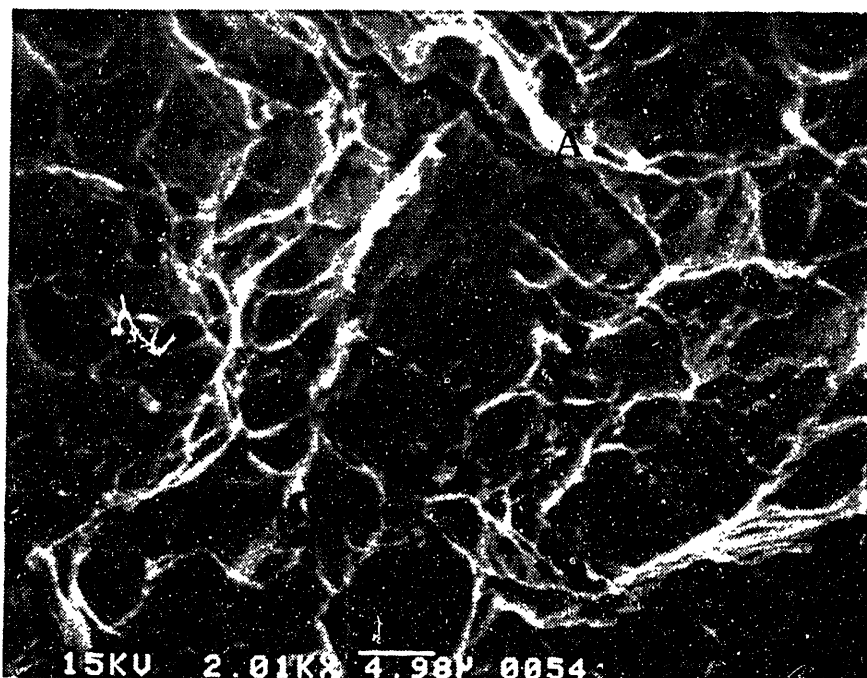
Fracture surfaces of GTA welds at lower magnification, showing continuous arrays of dimples along the dendritic structure.
